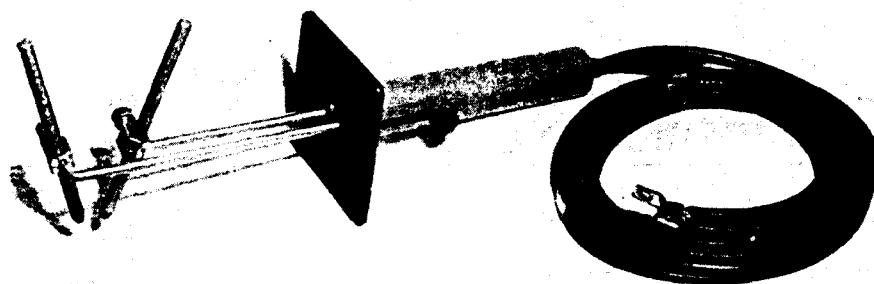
A Twin Carbon Arc Welding Torch
